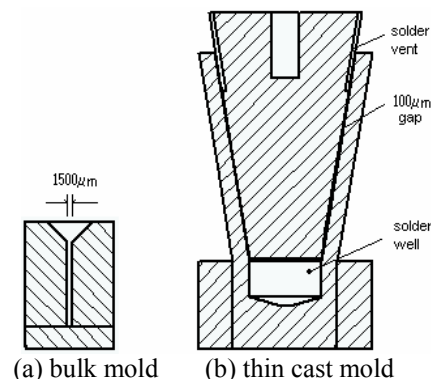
Bulk and thin cast material mold designs. Molds were made of stainless steel.
